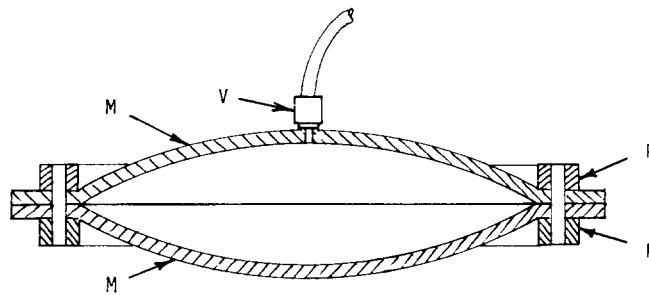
Fluid admitted under pressure through valve *V* inflates sheet metal *M* held between clamping rings *R*.
